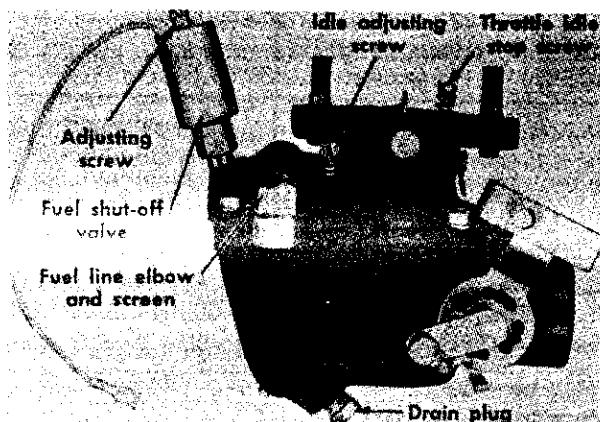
View showing adjusting screws on Marvel-Schebler Model TSX896 carburetor. Main fuel adjusting screw is on fuel solenoid shut-off valve.
